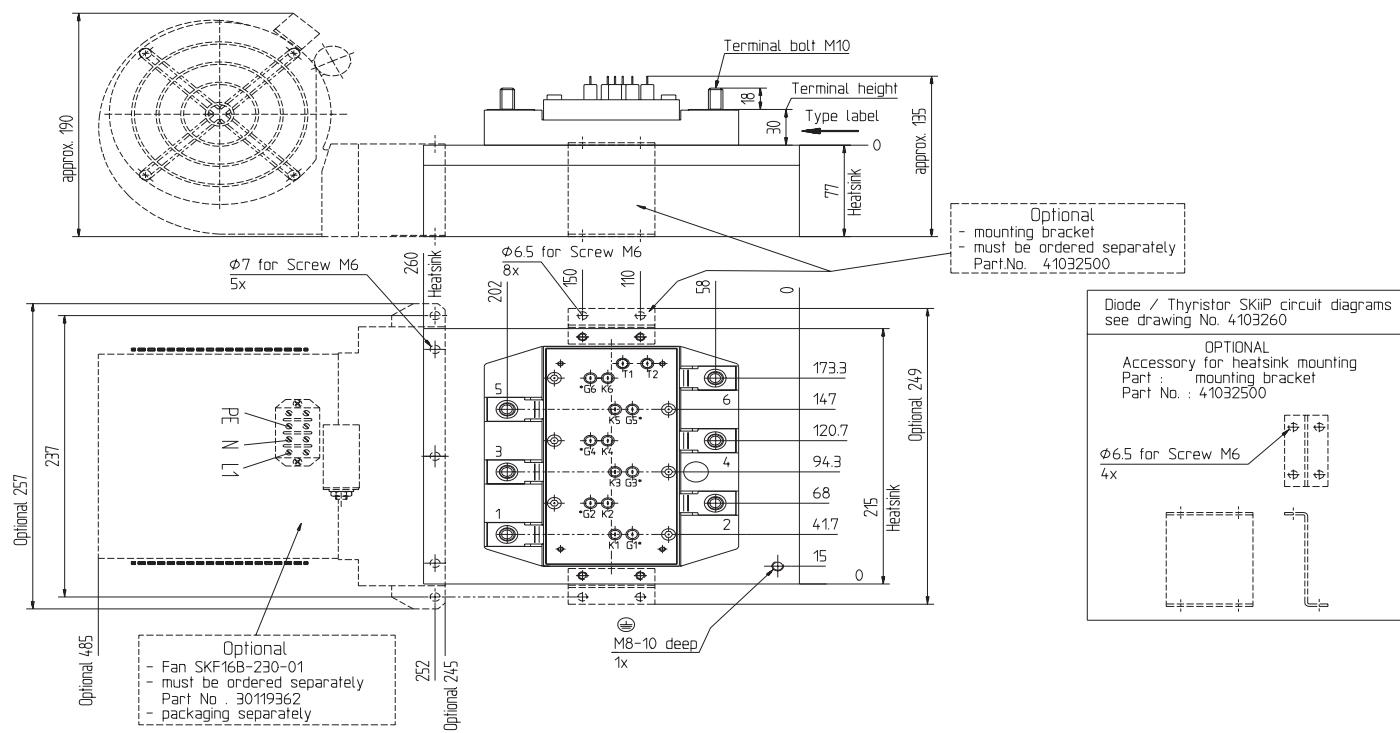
Mechanical outline (in mm) with optional fan and mounting hardware
